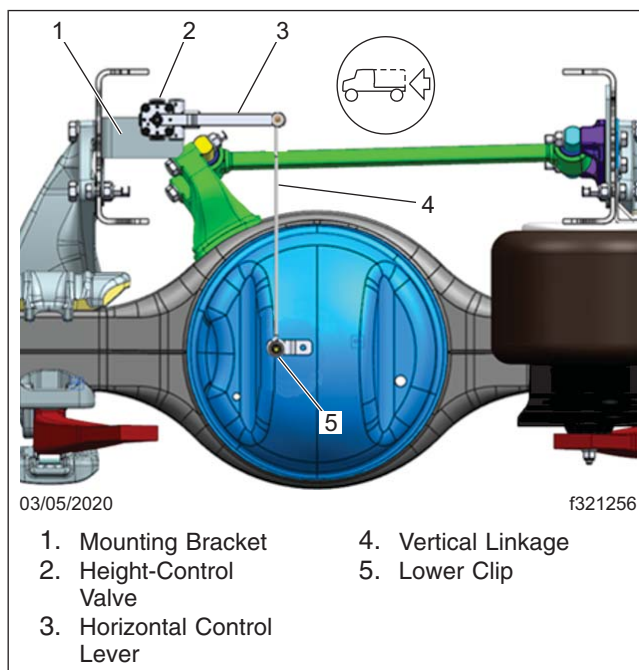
, Height Control Valve Mounted on Rear of Mounting Bracket
